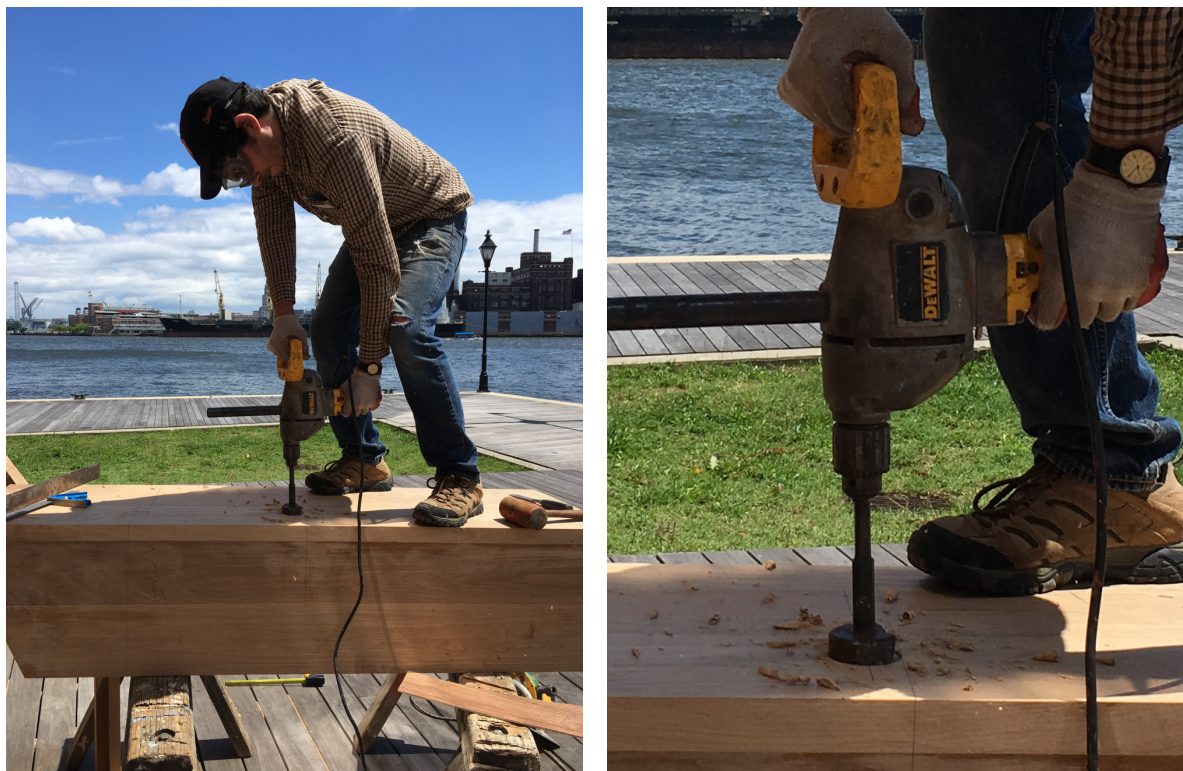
Drilling out holes in a cat-head (left); close-up of the tool with Forstner bit attached (right).
